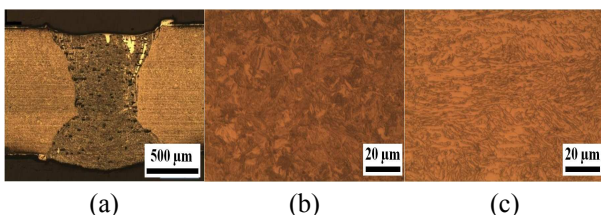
Microstructure of laser welded specimen with same thickness. (a) Section of weld zone, (b) Base metal, (c) Weld metal (Heat treatment temperature : 1173 K, waiting time : 0 sec)
